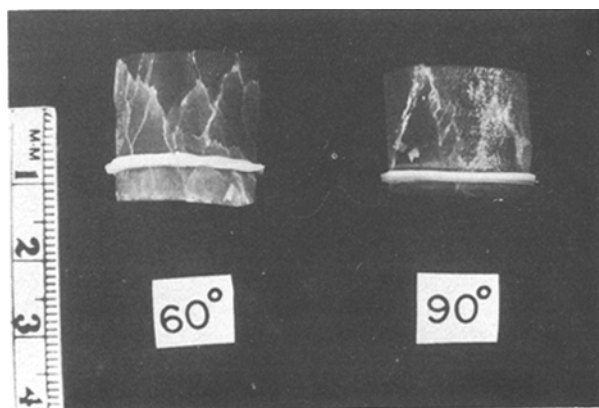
Fractured specimens showing cracks on the surfaces of 60 and 90° specimens.
